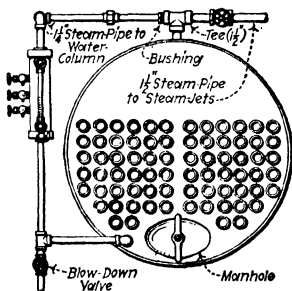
An incorrect and dangerous arrangement of water column and steam-jet connected to same outlet from boiler.
